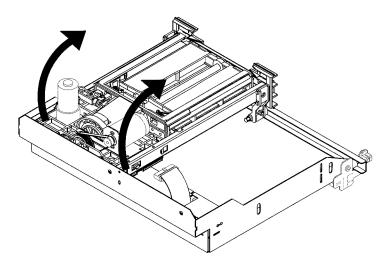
Rotating the Picker Assembly Out of the Translate Frame
